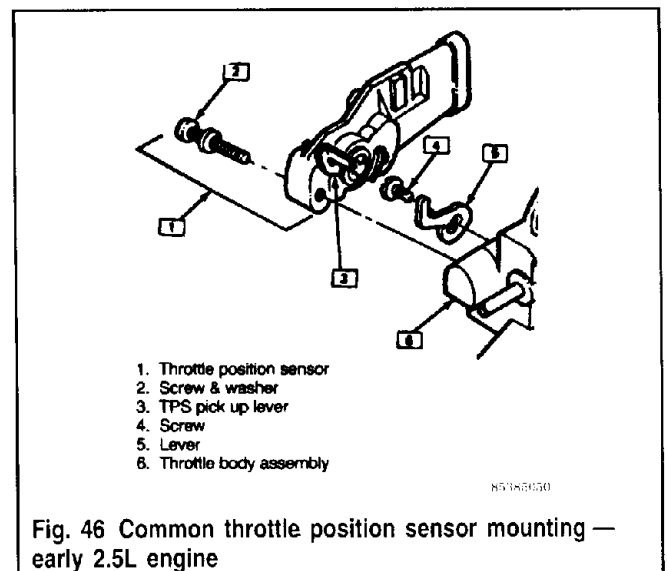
Common throttle position sensor mounting — early 2.5L engine
